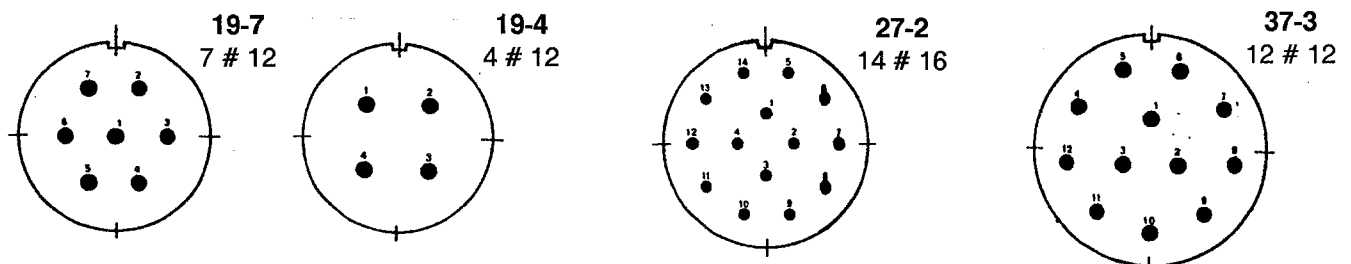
(a) - STANDARD CONTACT ARRANGEMENTS - FRONT VIEW PIN INSERT
